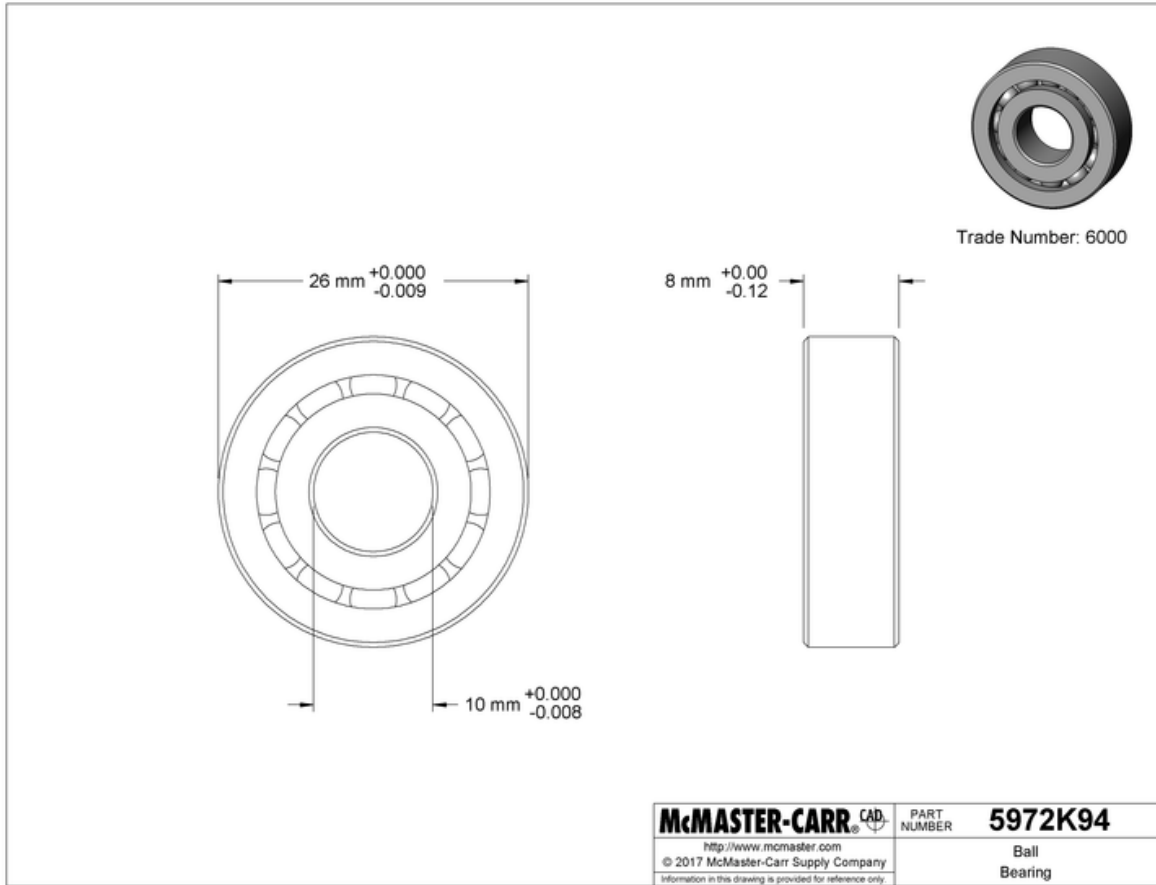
Ten Millimeter Shaft Diameter Ball Bearing Engineering Drawing [28]
